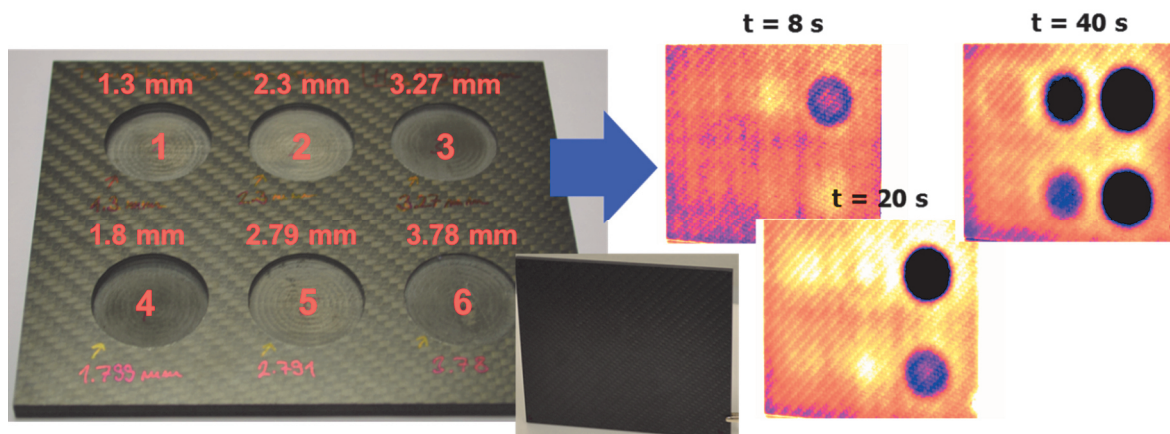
IRNDT inspection of carbon-epoxy demonstration sample
